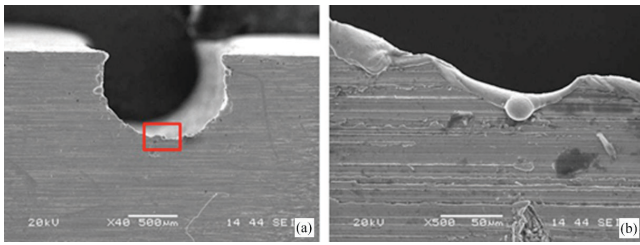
AISI4140: a) a drilled workpiece half, b) magnified view of selected region
